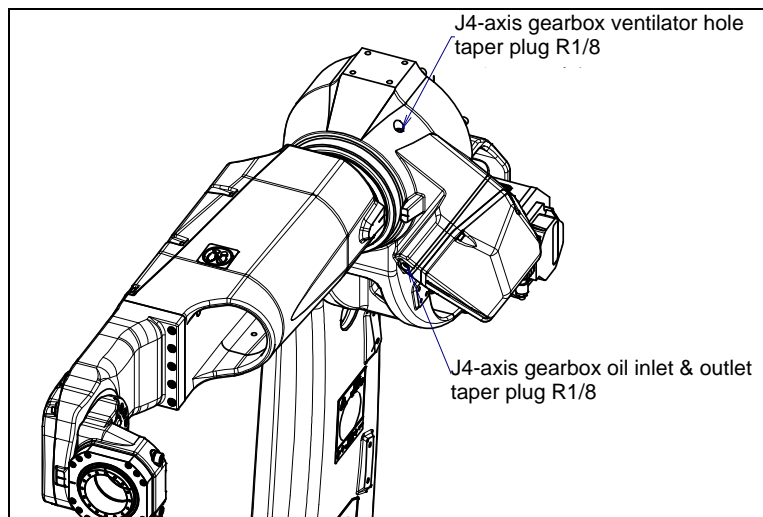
(a) Greasing point of J4-axis gearbox
